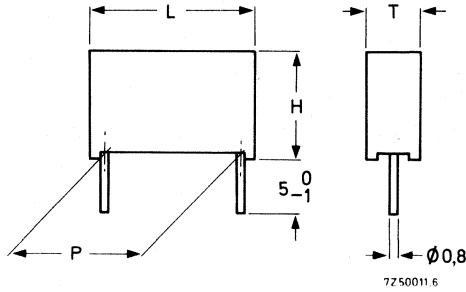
For dimensions T, L, H and P, see Tables 1 to 4.
